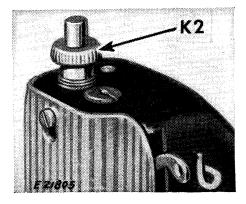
Thumb Screw For Regulating Pressure on Presser Foot
